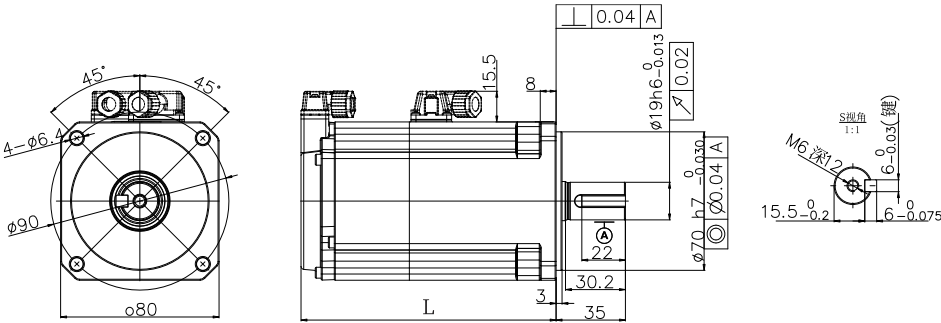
0.75kW, 1kW Motor Dimensions (mm)
